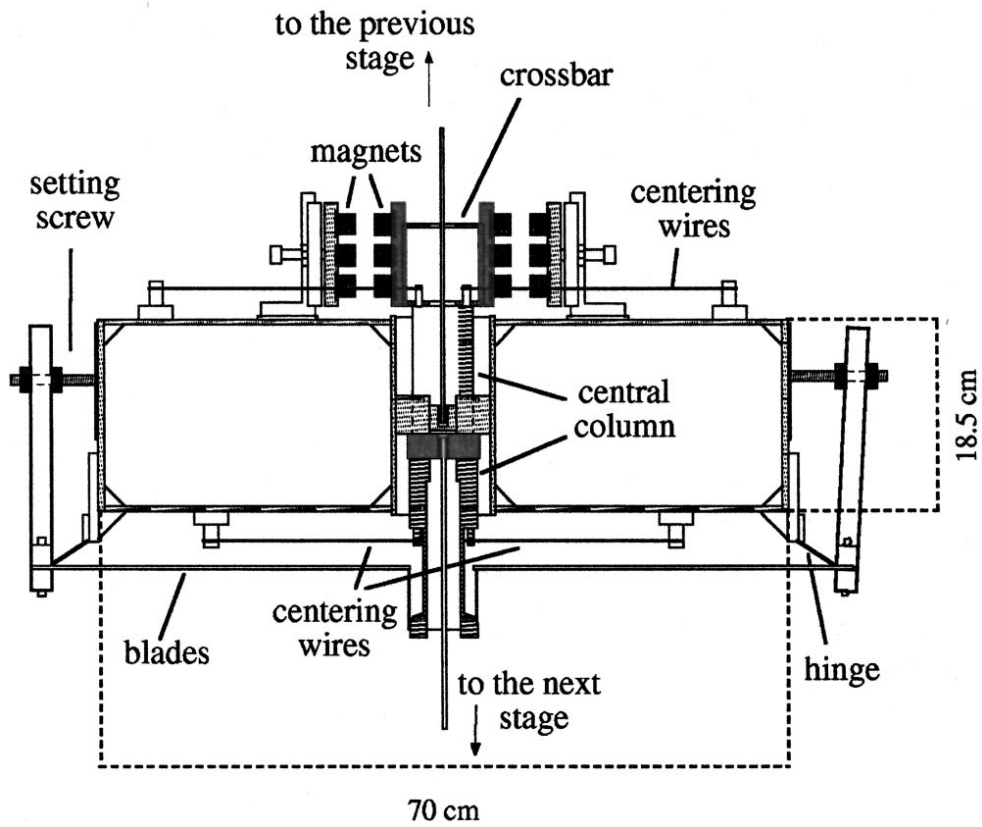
Drawing of a mechanical seismic filter of the initial Virgo [44]. All the main components are indicated.
